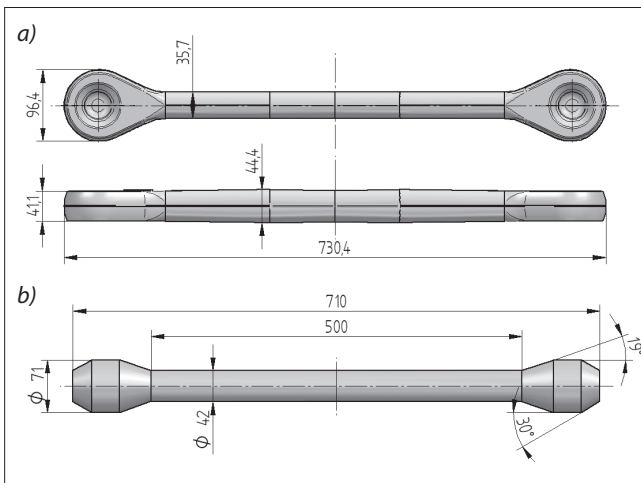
The shackle forging before the bending operation (a) and the preform used to make it (b)
